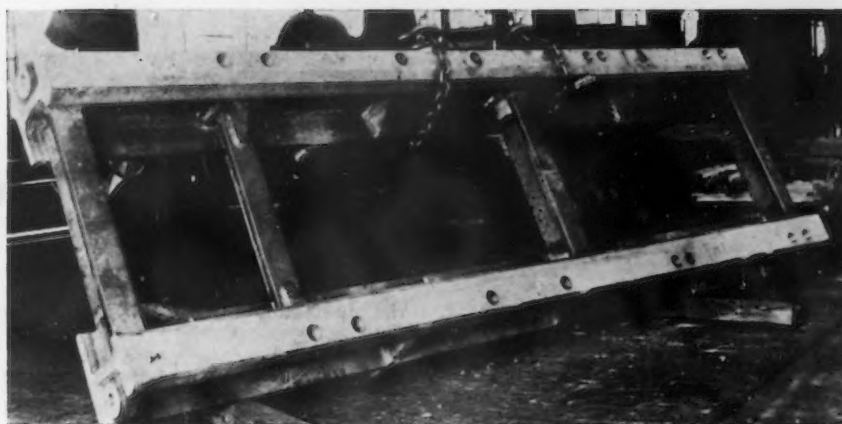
One of five 18-ft. welded mill shoes. About 1400 lineal feet of welding was required on the five shoes.
